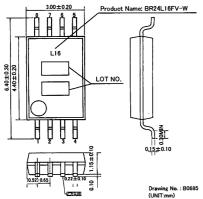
(c) PHYSICAL DIMENSION SSOP-B8 (BR24L16FV-W)
